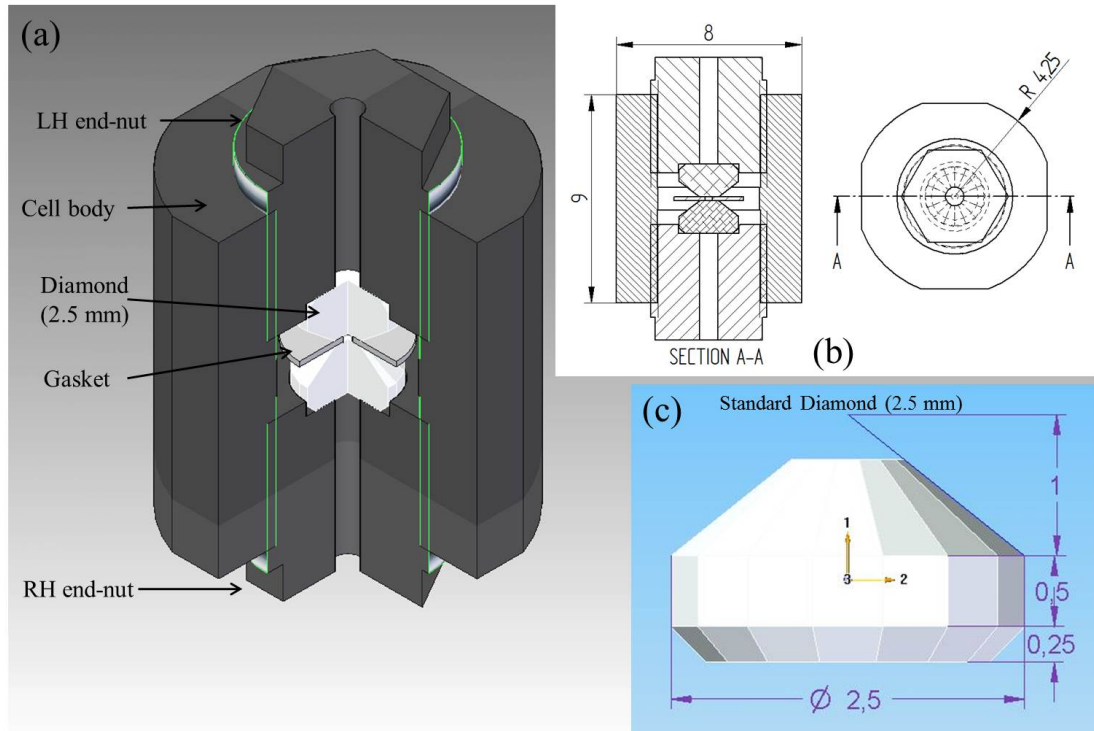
(a) Quarter section view of the initial design of PTM-DAC (LH and RH stand for left-hand and right-hand thread, respectively); (b) engineering drawing with key dimensions; (c) standard cut diamond.
